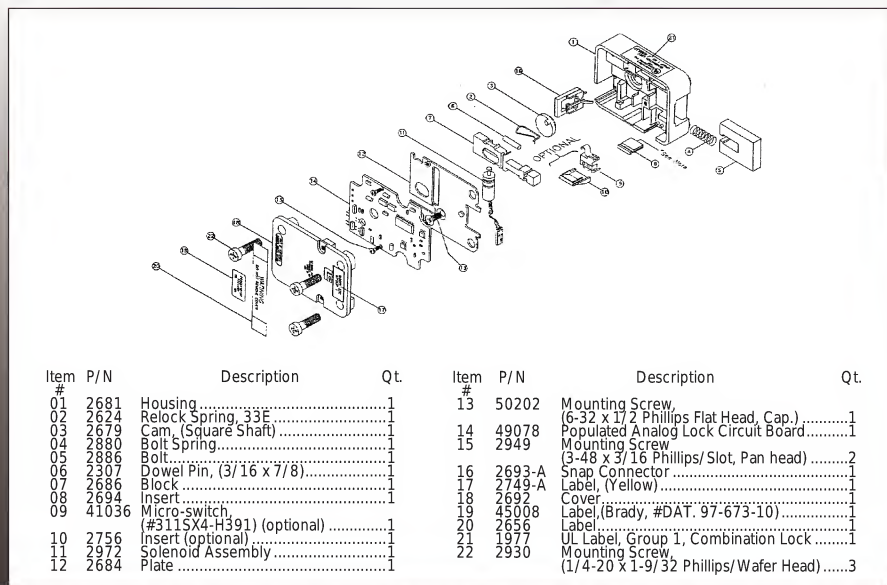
Illustration B. Exploded view of the LaGard 33 Series electronic lock.
